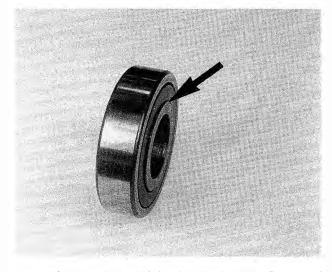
Input shaft bearing showing protruding part of inner race (arrow). Protruding side of inner race faces gear train.
